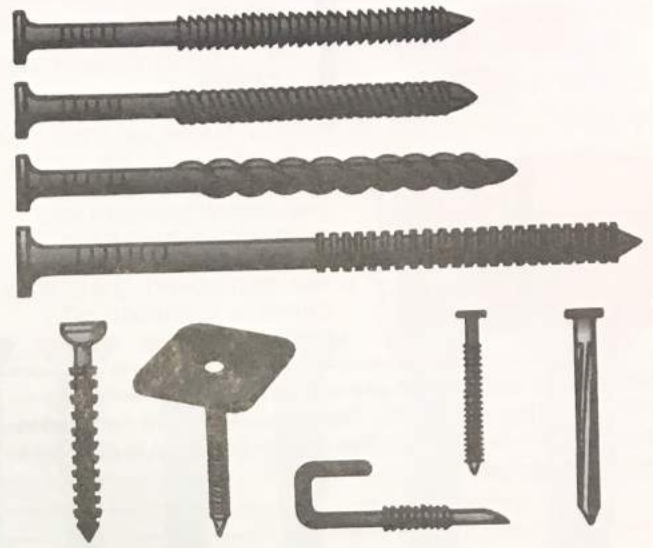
Improved nails have threaded shanks, which give them more holding power than regular nails.
